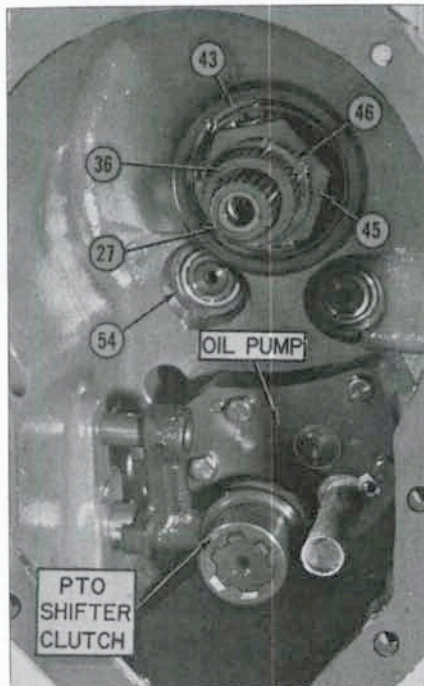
View into D-17 "Power-Director" compartment showing the inner clutch shaft (27) and the outer (hollow) shaft (36).
